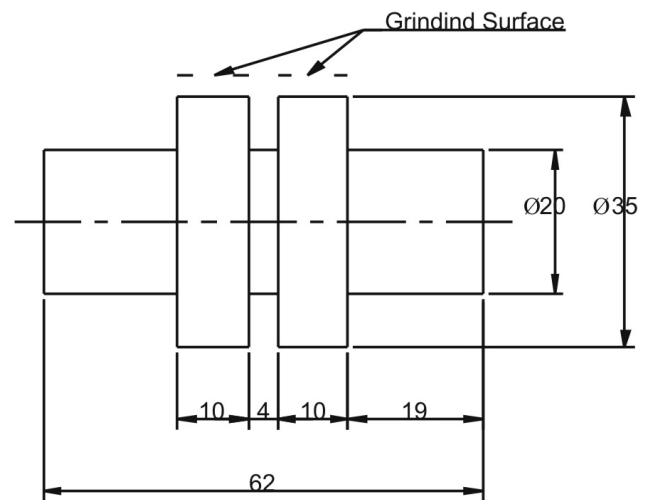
Workpiece used for testing a grinding hardening cycle (Dimensions in mm).
